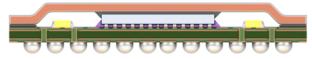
Cross-section schematic of the 45-mm FCBGA package used in this study.
